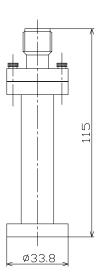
Dimensional drawing for measuring unit GP-BH
